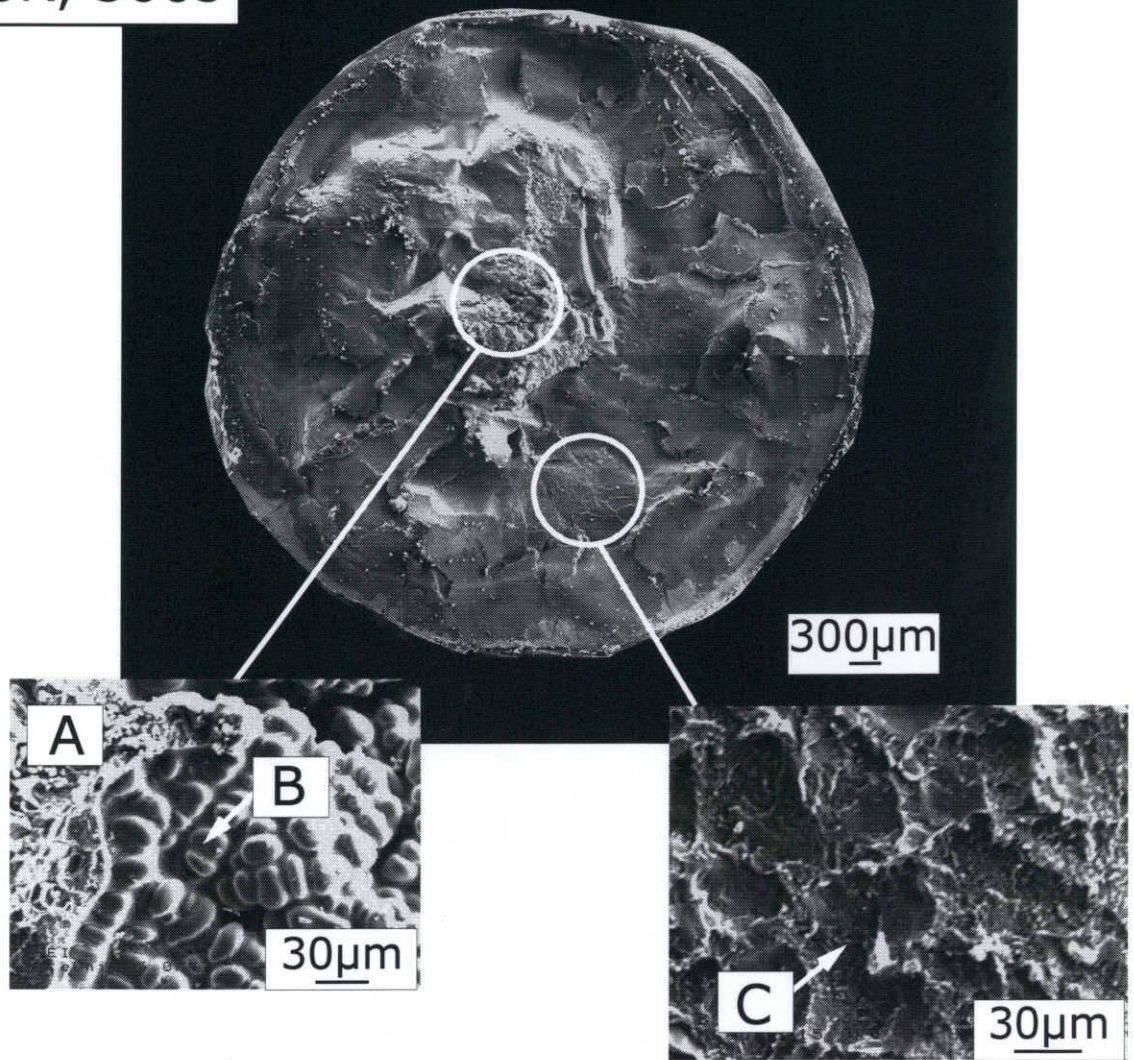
Overview and fracture surface of Al /Cu/Al;
